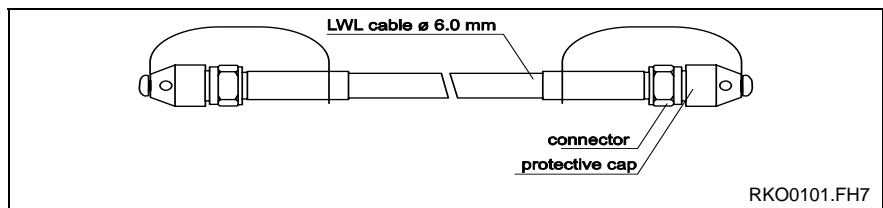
RKO 0101 Fiber Optic Cable Assembly
